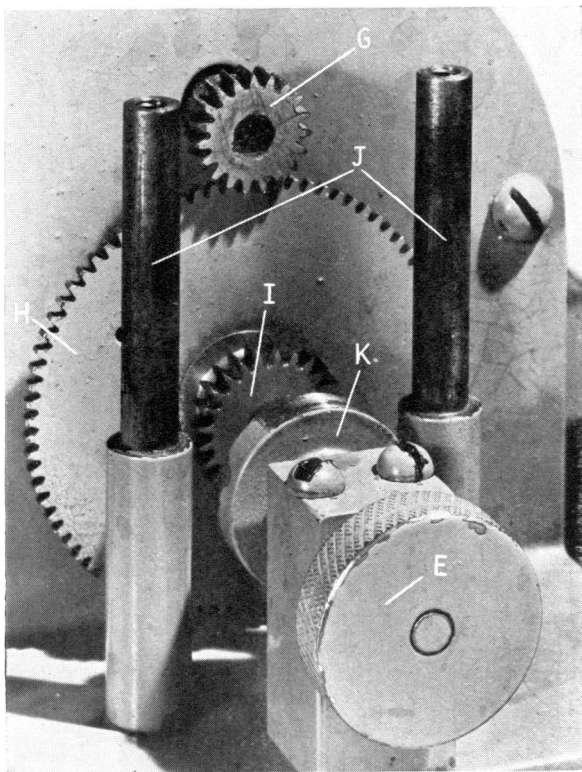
Details of the driving gears and quick-release device (rack and casing removed).
